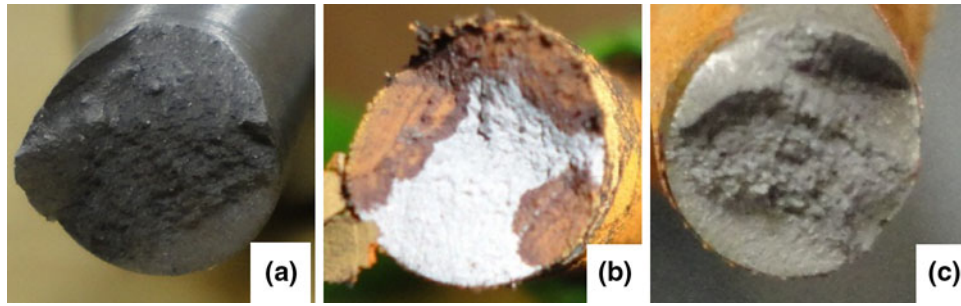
Fatigue fracture surfaces of (a) as-machined (max stress = 650 MPa), (b) NaCl-exposed (max stress = 550 MPa), and (c) CMA-exposed (max stress = 615 MPa) samples. The NaCl fracture surface exhibited corrosion after the fatigue test was completed indicating moisture and NaCl were trapped in the oxide surface layer
